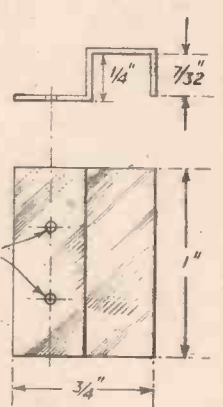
Details and dimensions of the clips which enable the strips to slide on the frame.
